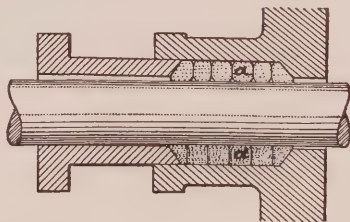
Asbestos packing in stuffing box of steam cylinder.
